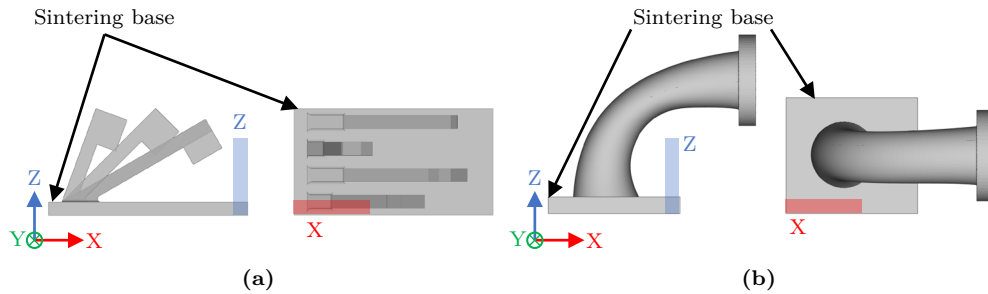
The print direction of (a): 4-member specimen and (b): manifold specimen.
